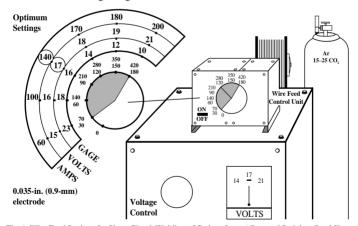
Wire Feed Settings for Short-Circuit Welding of Carbon, Low-Alloy, and Stainless Steel Sheet.
